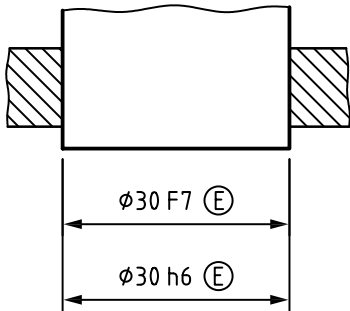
Example of assembly drawing with ISO code system tolerancing of two features of linear size in a fit
